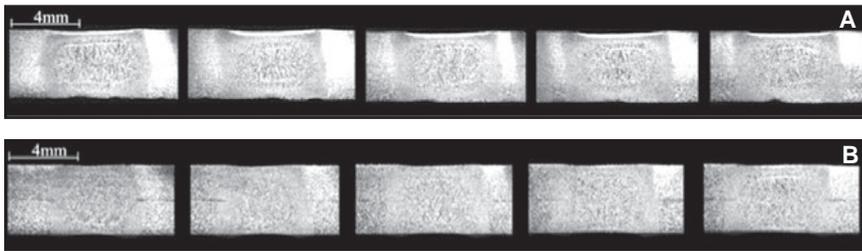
Cross-sectional views of the shunt and shunted welds made on a 2-mm bare mild steel, with 8-mm weld spacing. The parameters were welding current = 6 kA, welding time = 500 ms, and electrode force = 2.8 kN. A — #9 in Table 4 and 1.8 kN; B — #11 in Table 4.
